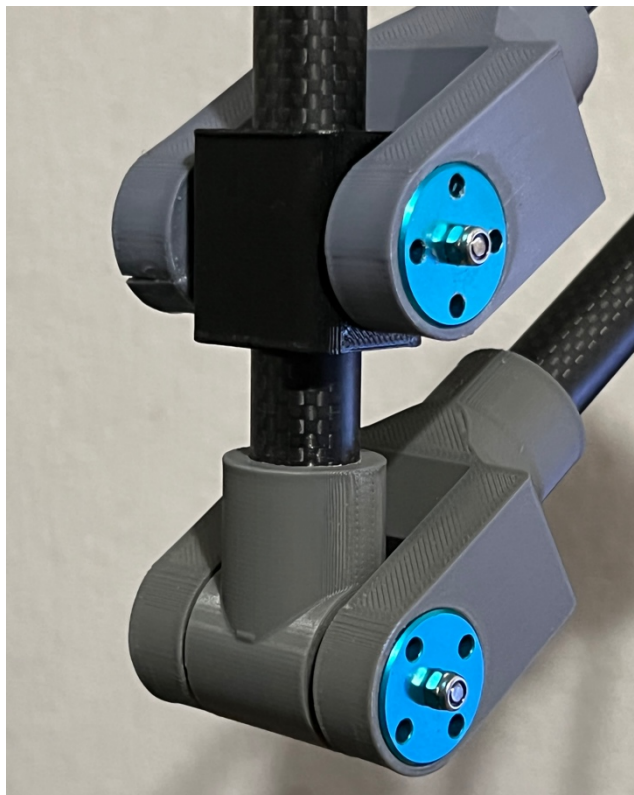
2D arm joints. The arm joints constitute a critical part of the design of the arm mechanism, since the use of small ballbearings ensures very low joint friction and the use of aluminum flanges and 3D printed parts realized a precise mechanism which exhibits low mass.
